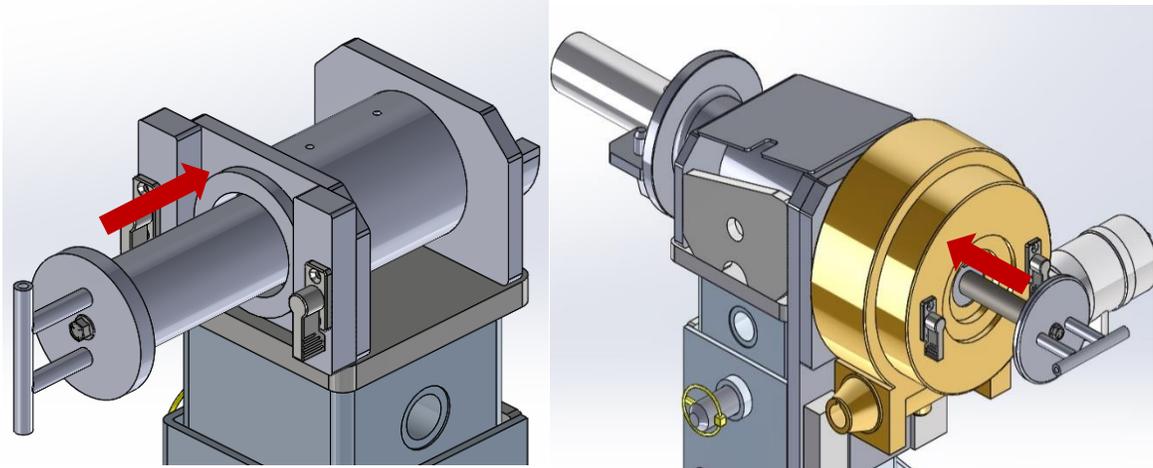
Operating Procedure for Welding Fixture Changeover, Push Shafts Back, Both Ends
